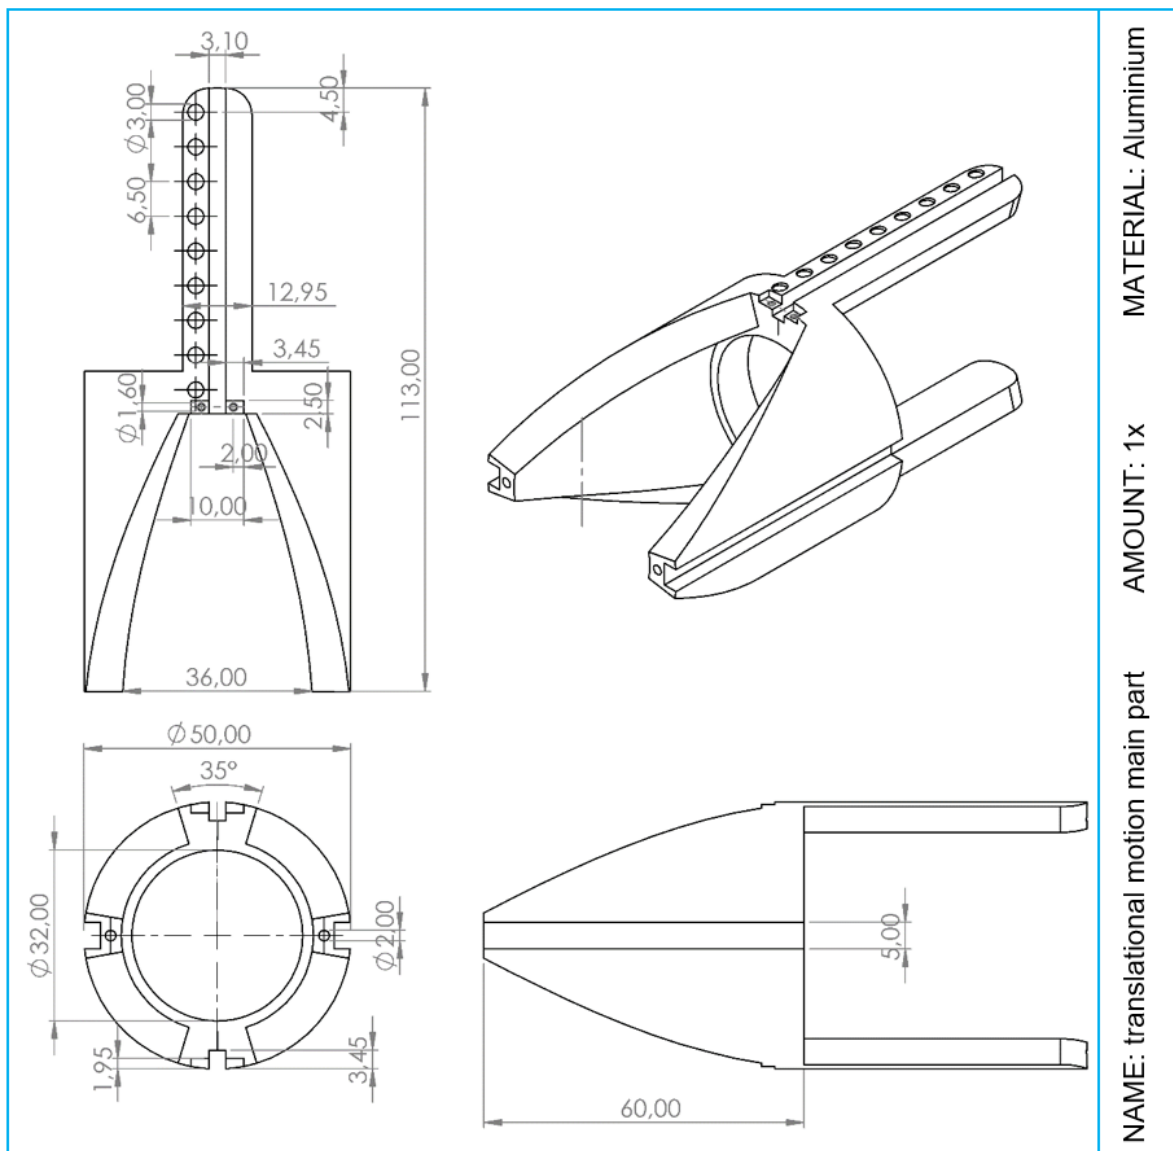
Construction drawings of the translational motion main part - Machined prototype
